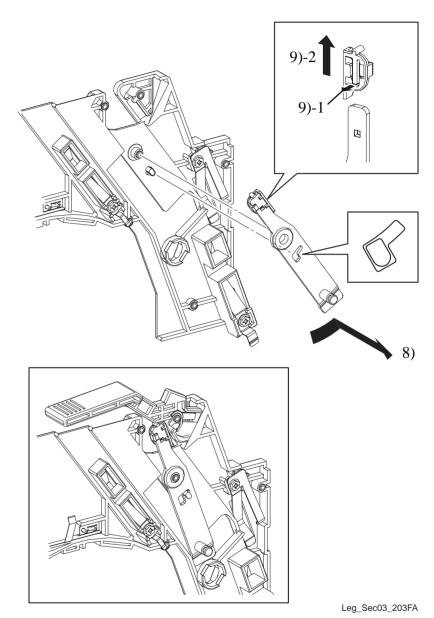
Removal of CAP-PLATE PR and PLATE-ASSY PR
